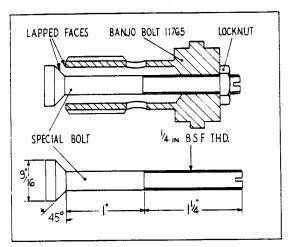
MODIFICATION TO BANJO BOLT FOR CHECKING RAM CYLINDER
